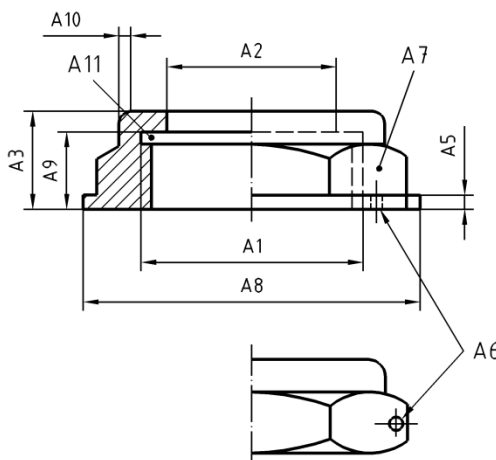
Type H.14 — External threaded connection gas meter flat seal cal .20 connection (2 of 2)
